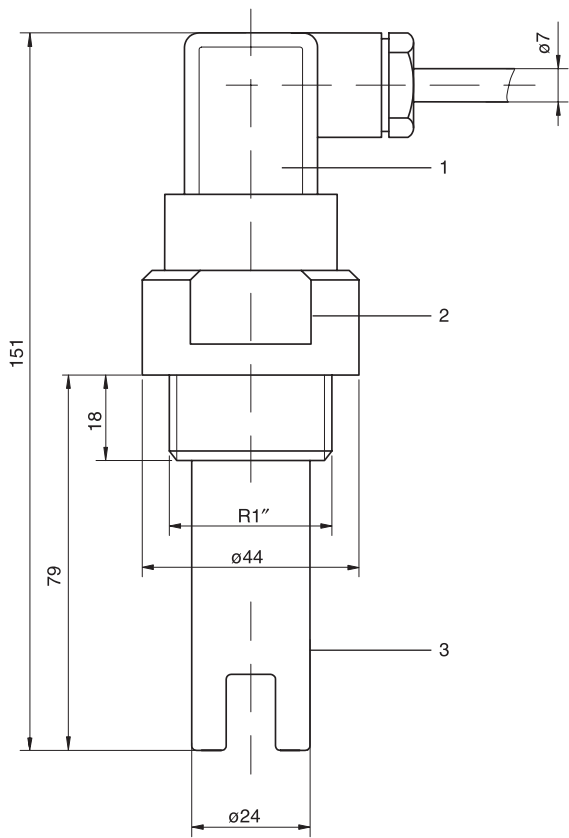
Dimension drawing SE 604 2-electrode sensor with AR 200 flow-through fitting
